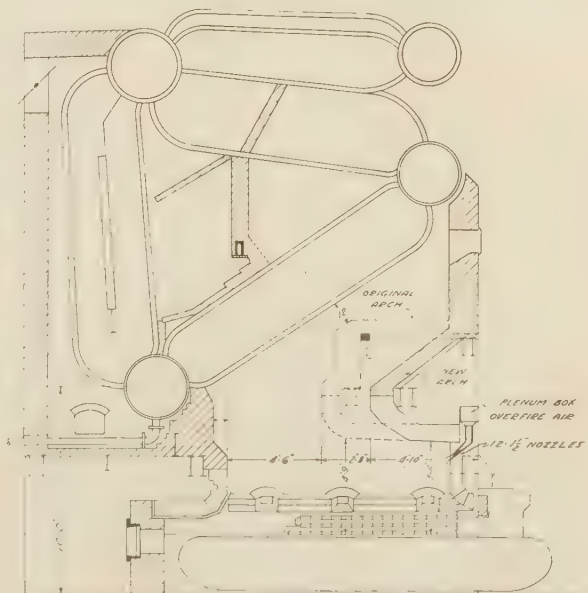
KIDWELL 613-Hp BOILER EQUIPPED WITH HARRINGTON STOKER
